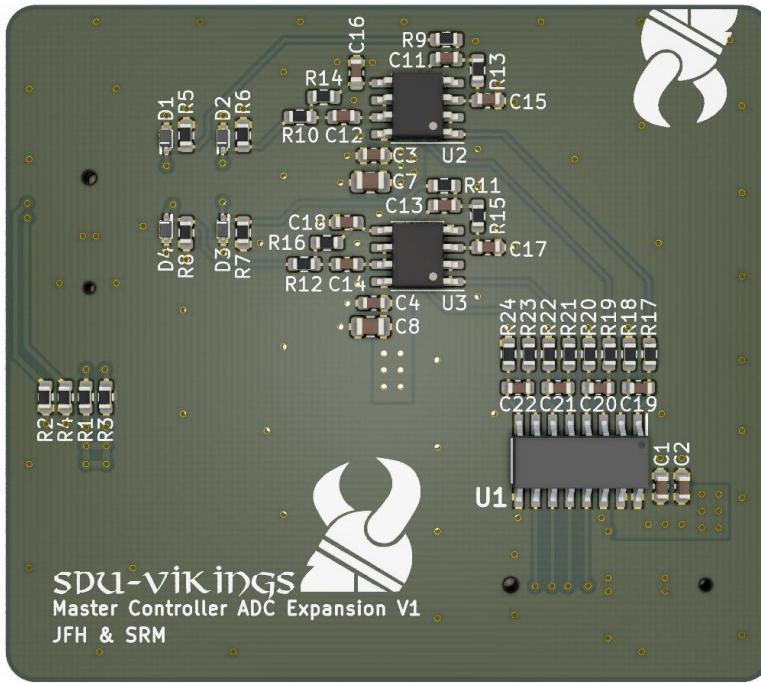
KiCad 3D rendering of the ADC Expansion PCB top
